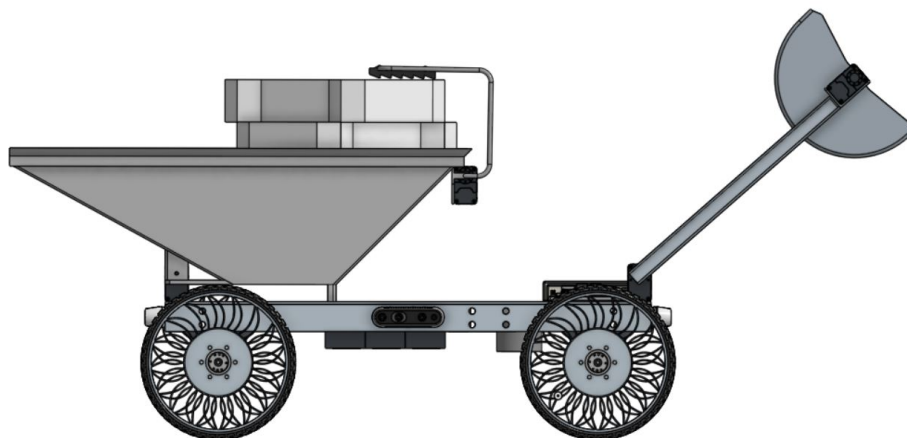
Rover side view. Side view of the rover design showing the overall profile of the chassis, wheel assembly, robotic arm system, storage bucket, and tile-handling mechanisms. The side layout highlights the rover's mobility configuration and the positioning of the material collection and transport systems used during autonomous regolith collection and tile placement operations.
